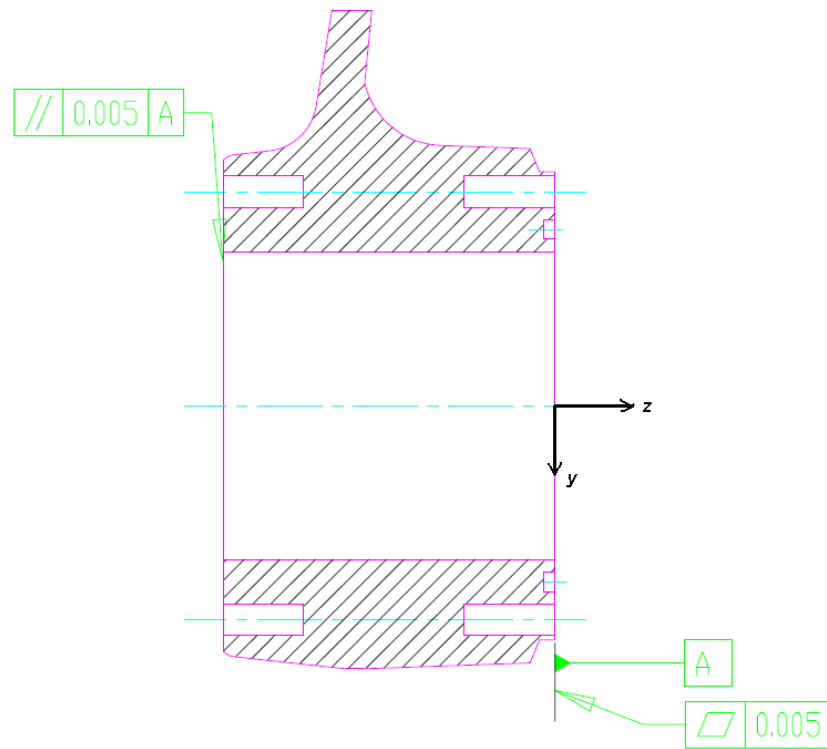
Flatness and parallelism tolerances of the test bearing housing side surfaces
